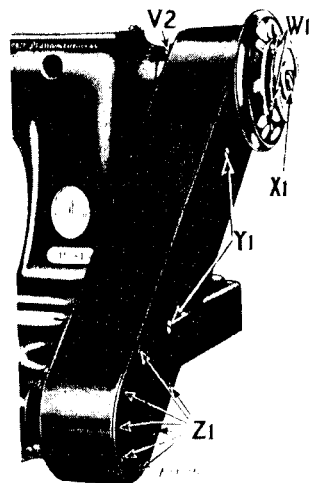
Removing Balance Wheel and Belt Guard Cover
